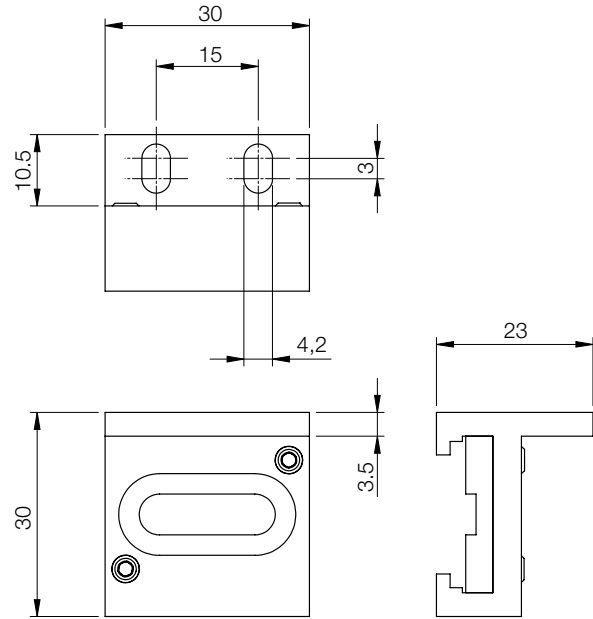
Mounting clamp MC-XA-028-B06-1
